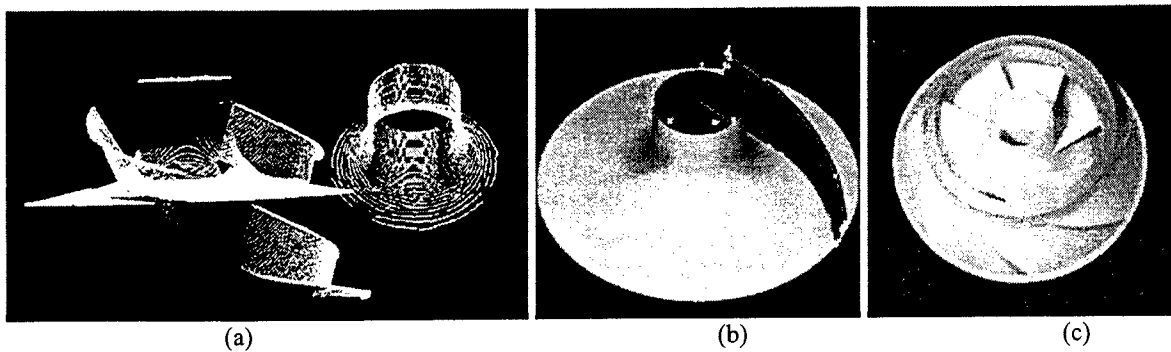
Impeller surface modeling. (a) Multi-view range data, (b) fitted impeller vane surfaces, (c) rapid prototyping.
